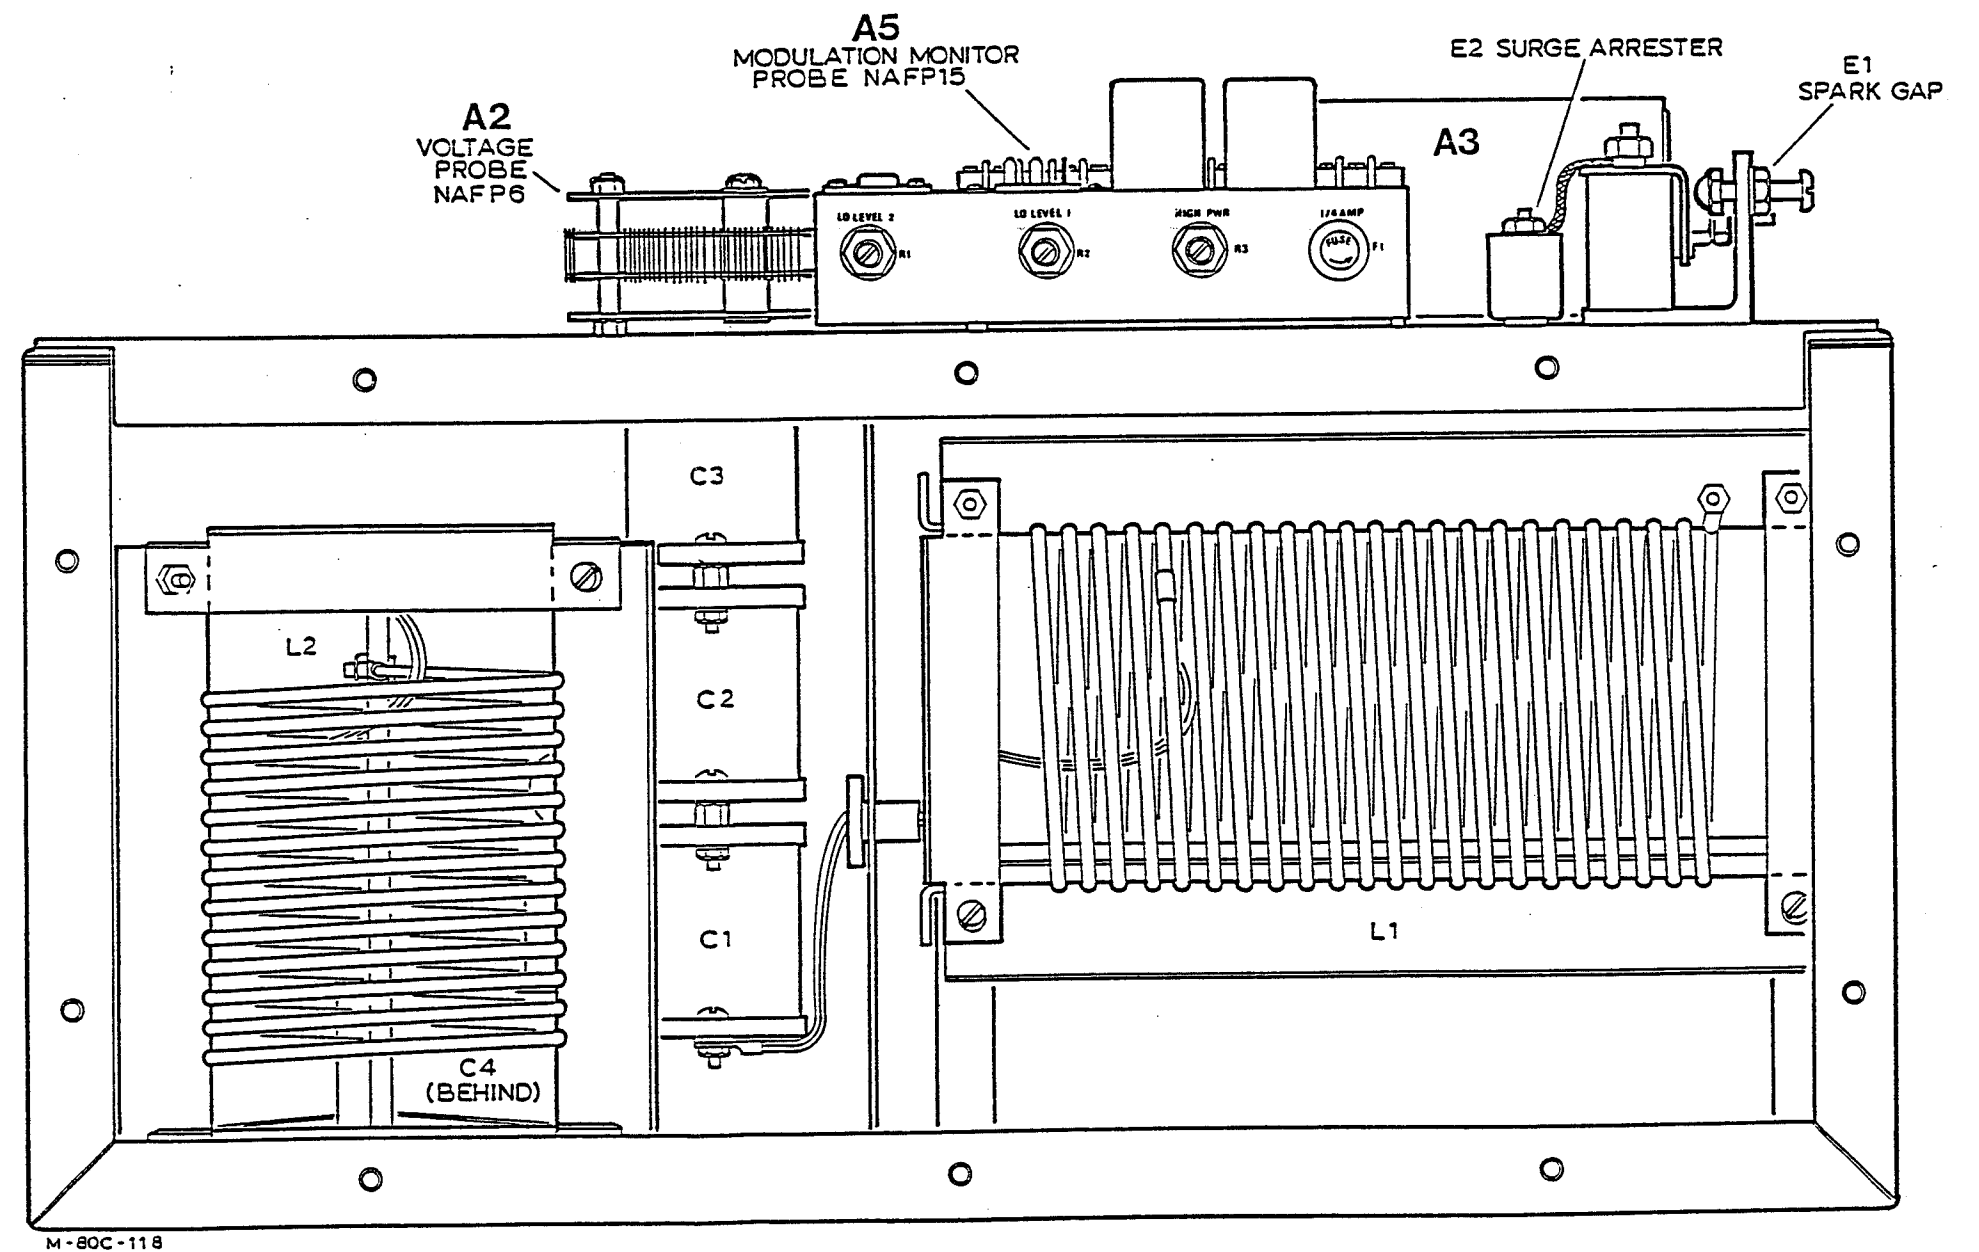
Assembly Detail - Harmonic Filter Assembly, Rear View
